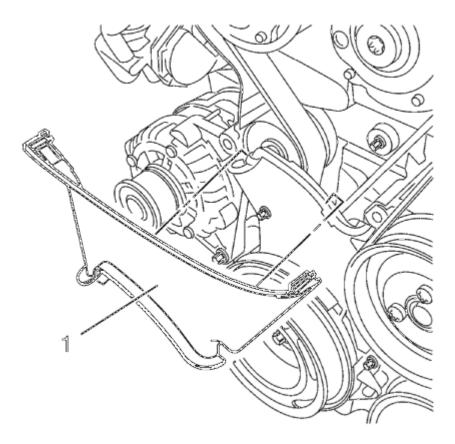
Timing Belt Center Front Cover Courtesy of GENERAL MOTORS COMPANY
